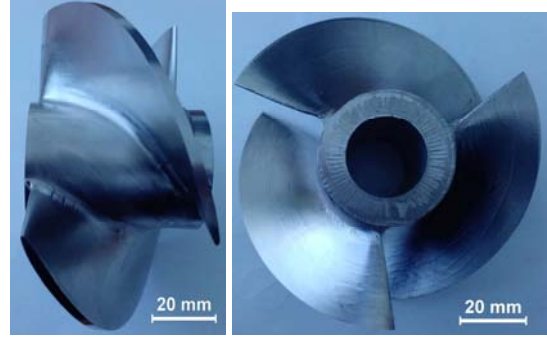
Side view (left) and top view (right) of the manufactured model inducer with three blades.
